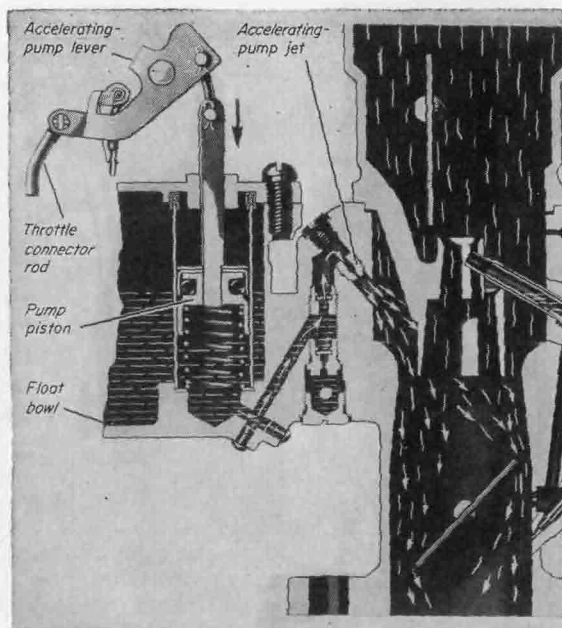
Accelerator-pump system in carburetor. When the piston moves down, fuel is sprayed from the pump jet as shown by the arrows. (Chevrolet Motor Division of General Motors Corporation)
